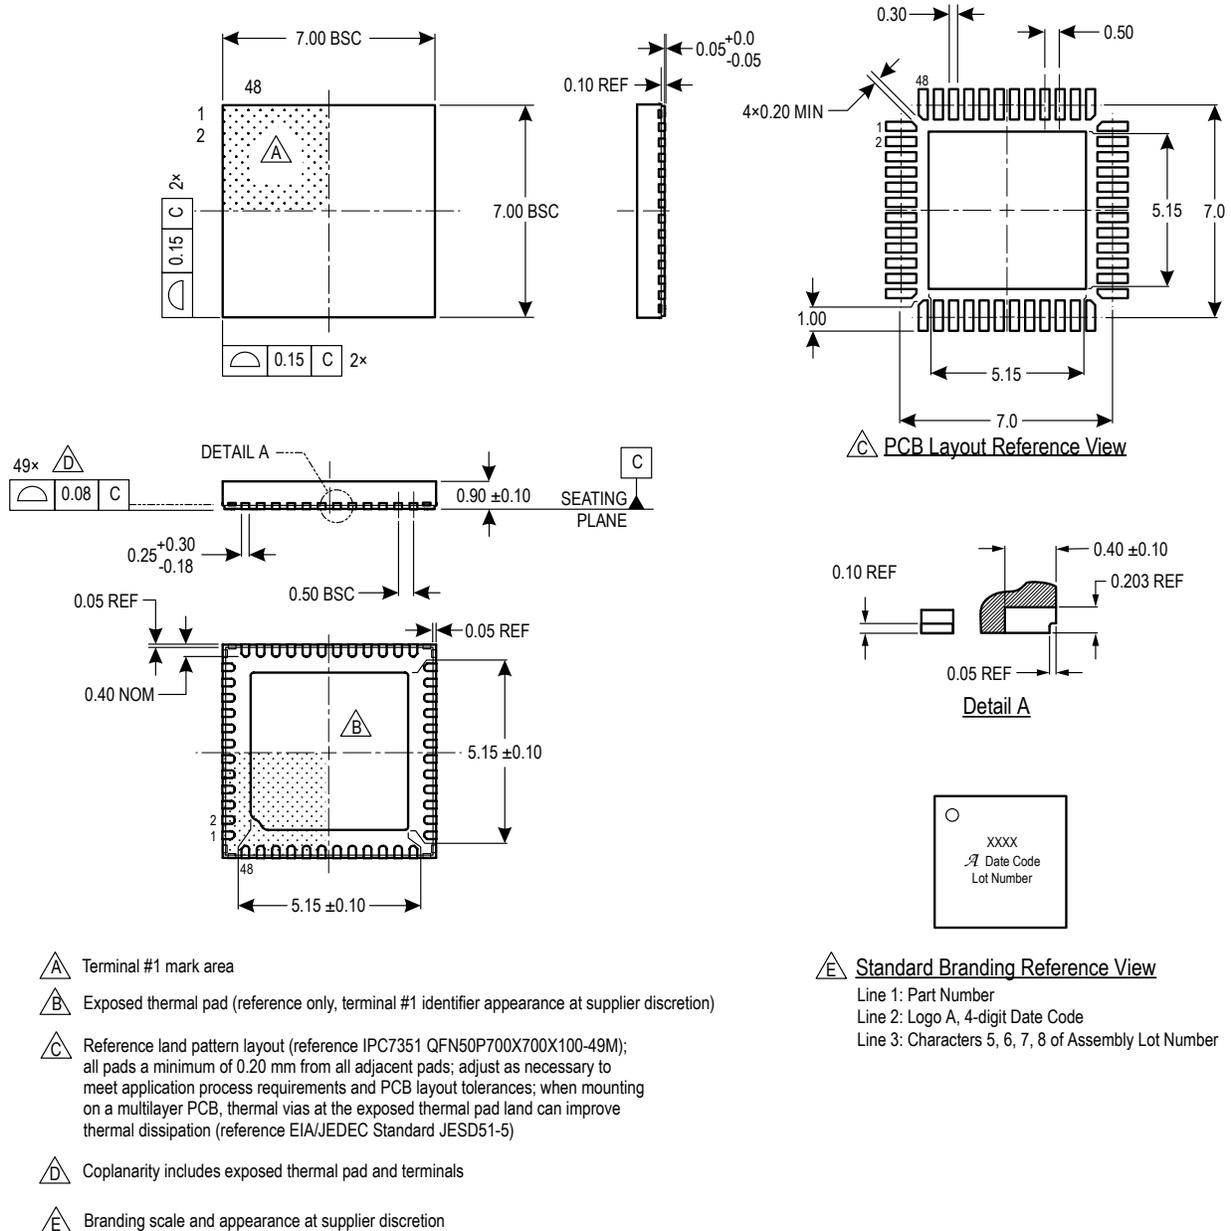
Package EV, 48-Pin QFN with exposed pad and wettable flank
